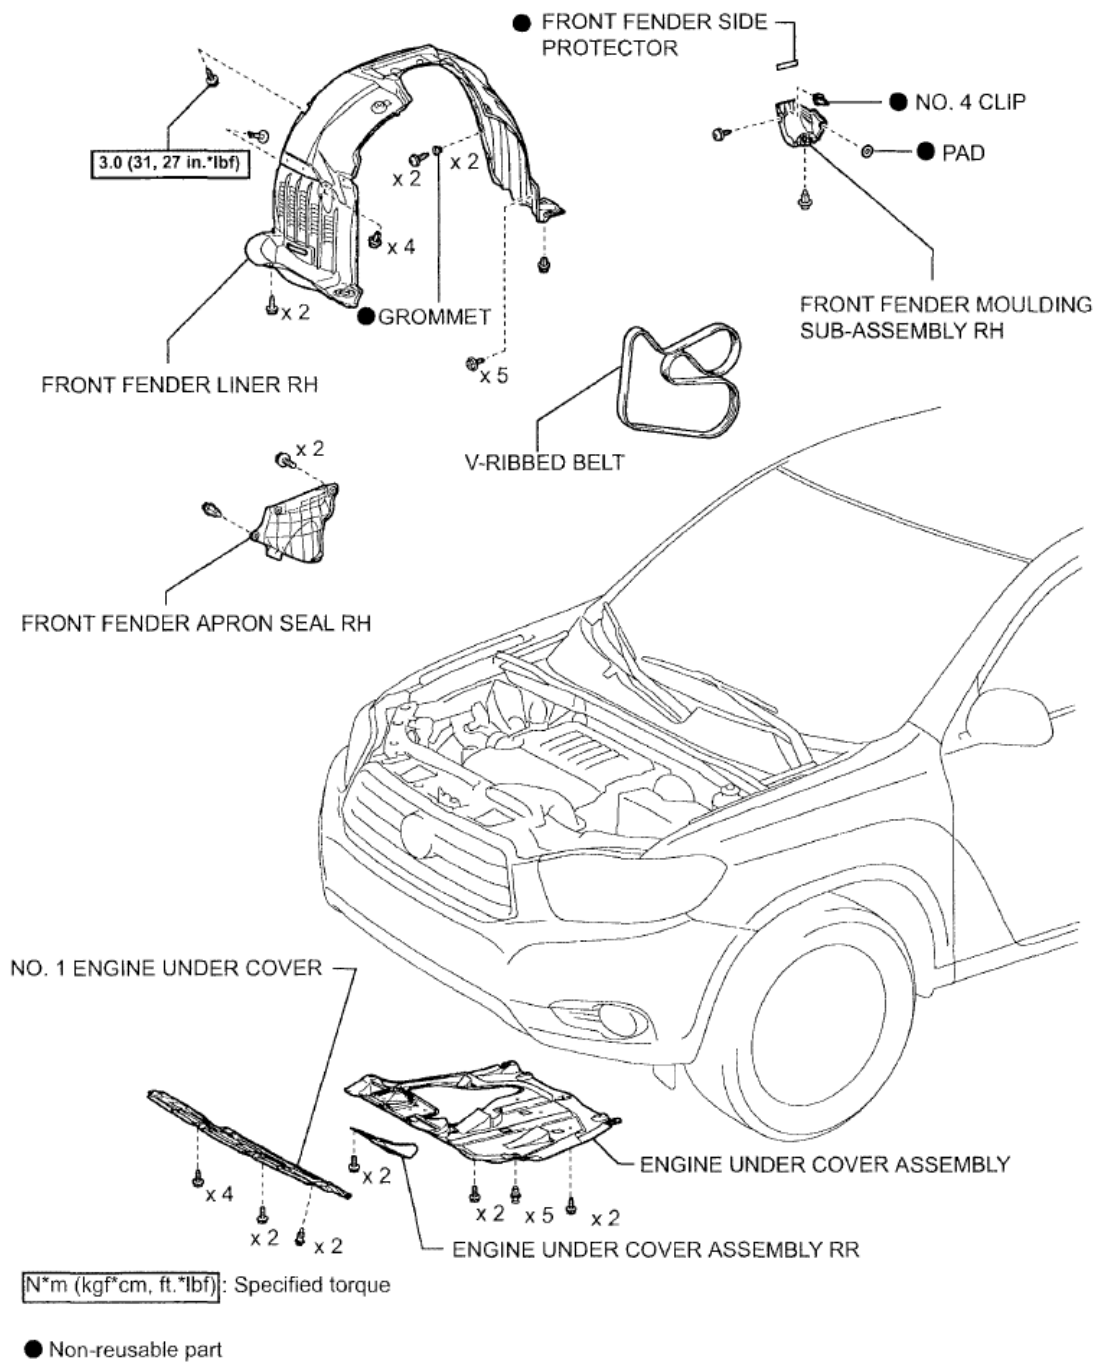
Identifying Drive Belt Components With Torque Specification With Torque Specification
